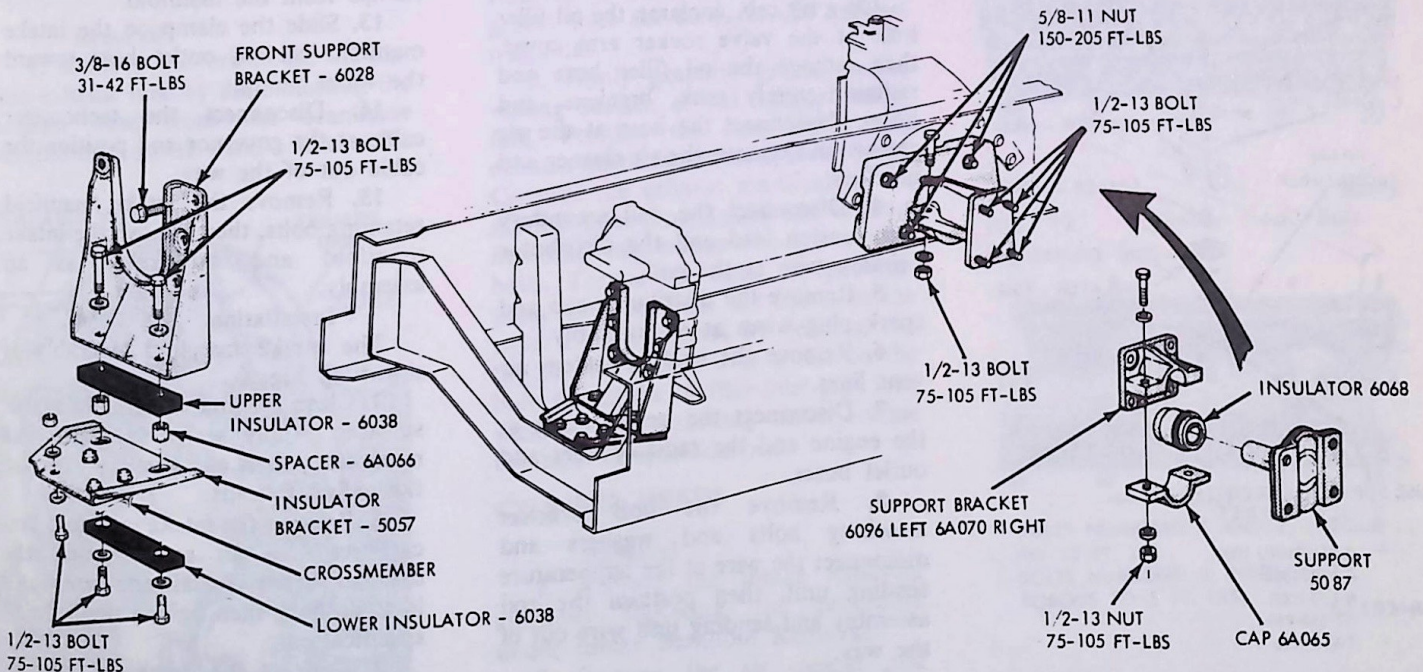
Engine Front and Rear Supports—L, LT, LTS, LN and LNT-Series
